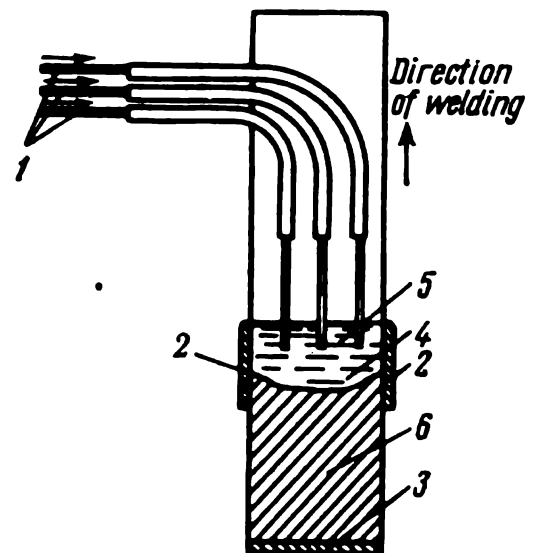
Principle of the automatic submerged slag-pool welding process
